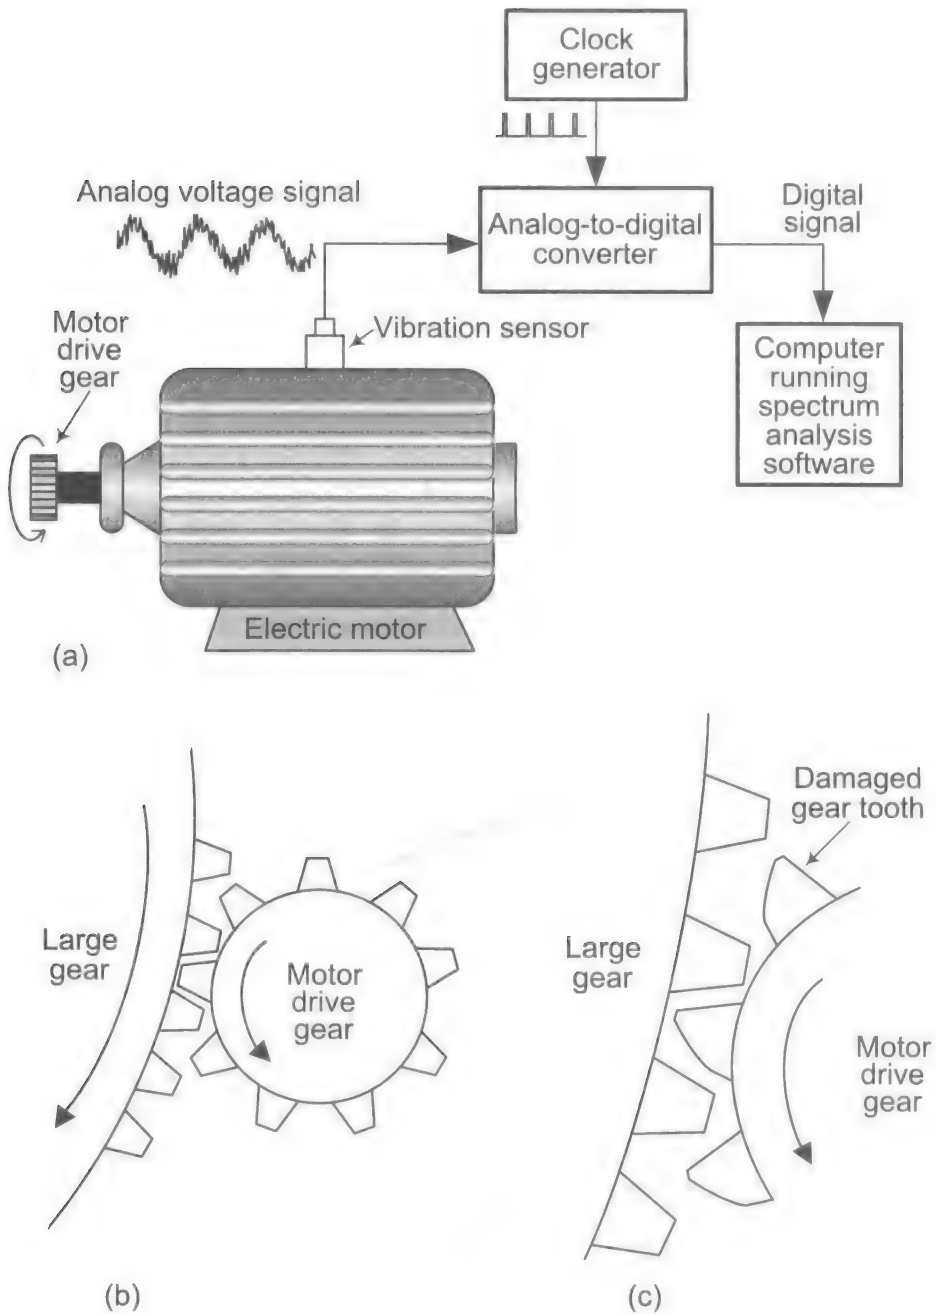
Electric motor and gears: (a) motor and vibration test setup; (b) new motor drive gear; (c) worn motor drive gear.
